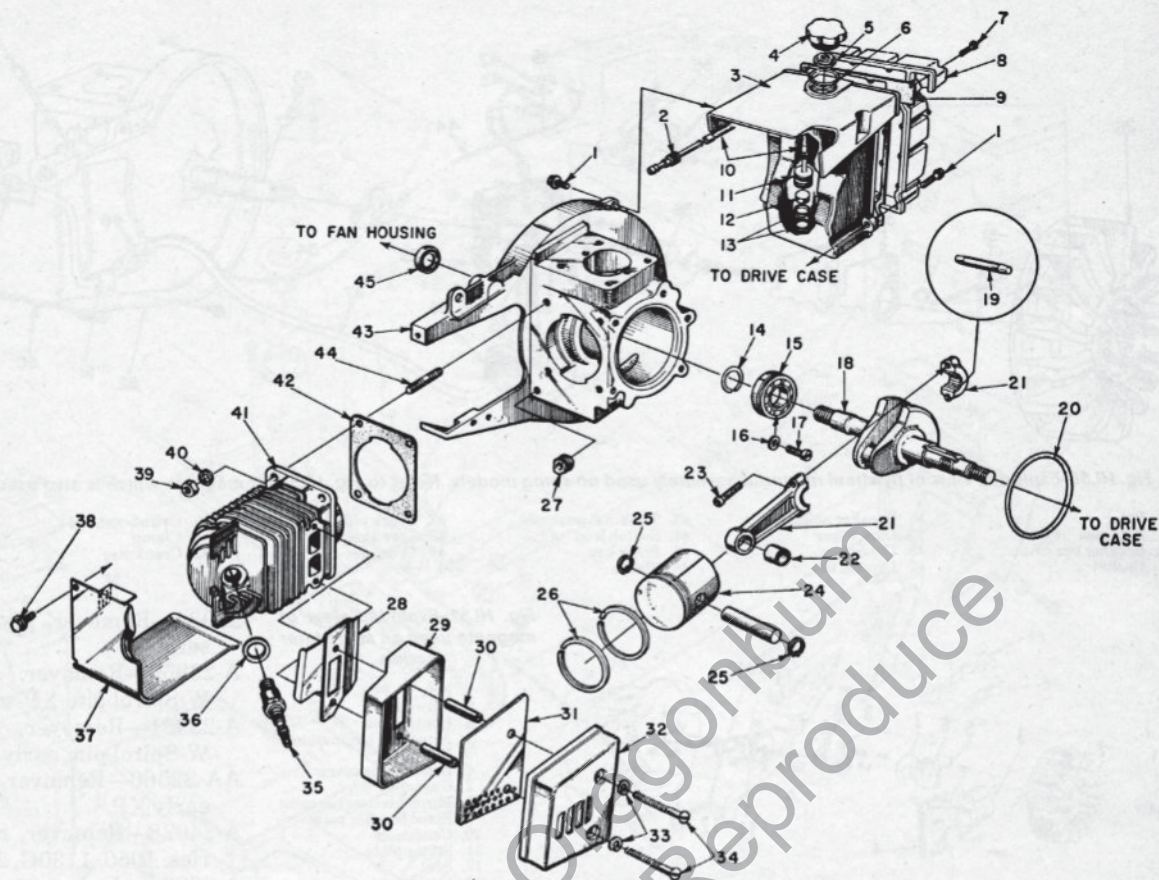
Exploded view of model C-7 powerhead and fuel tank. Other C series saws are similar. Gasket (9) is no longer used. Homelite cement No. 22788 is used in place of gasket to seal between tank and cover.
